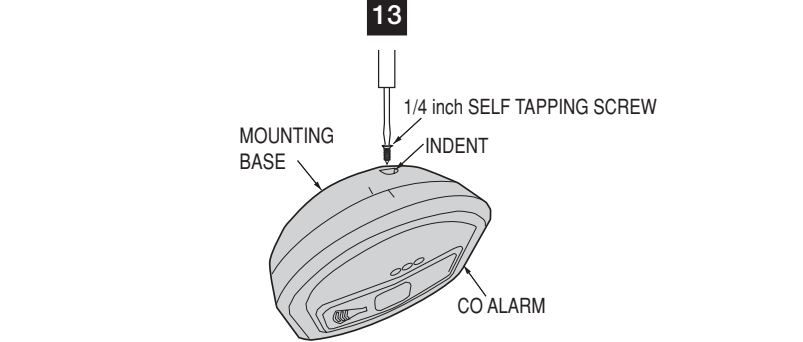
Tamper Option Using Screw to Fasten Mounting Base to Alarm
